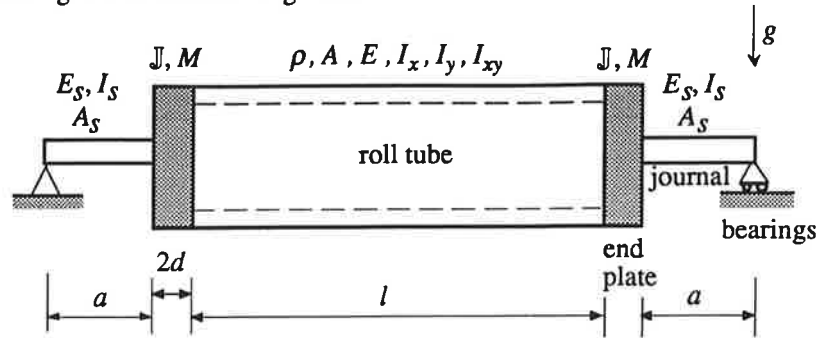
Spinning roll tube carrying rigid end plates resting on elastic journals.
